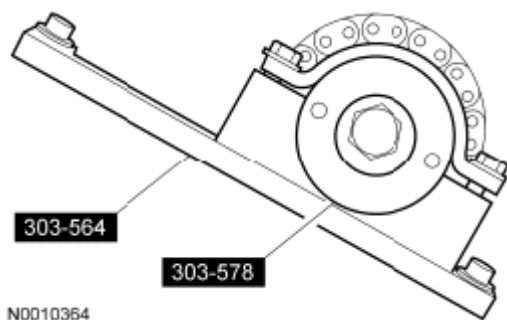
Identifying Camshaft Sprocket Holding Tool And Adapter
